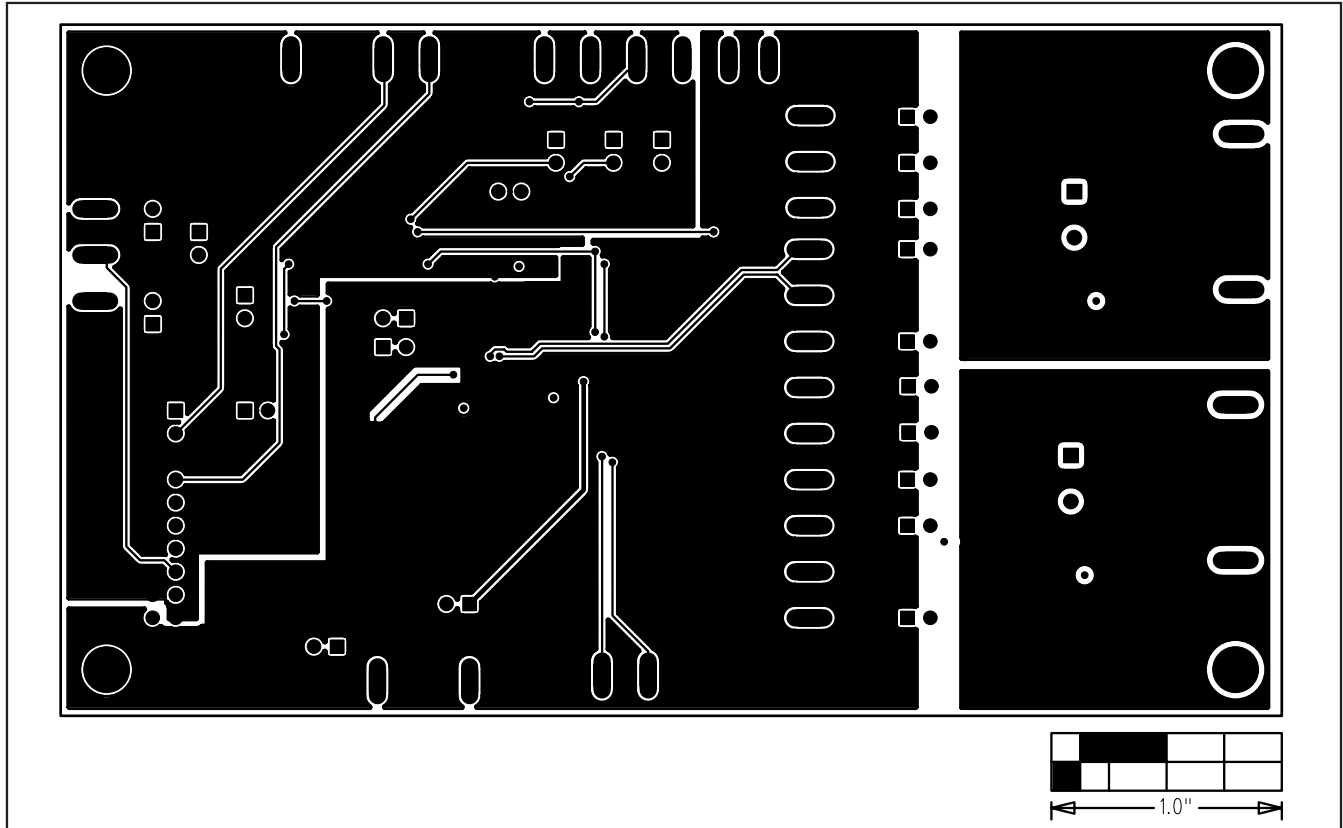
MAX1385 EV Kit PCB Layout—Solder Side
